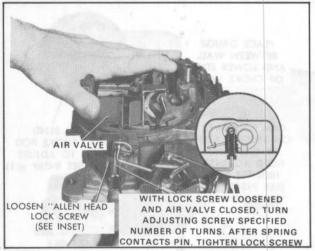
Air Valve Spring Wind-Up Adjustment
